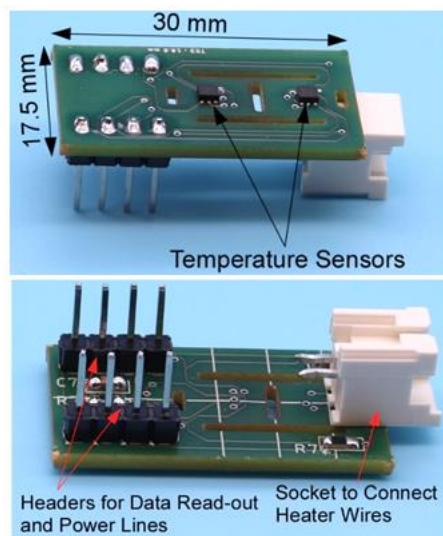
Assembled PCB: Top side (Top), Bottom side (Bottom).
